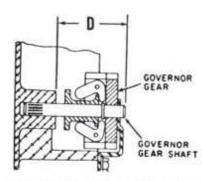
Correct installation of governor shaft and gear and weight assembly on Models HH70, HM70, HM80 and HM100. Dimension (D) is 1-% inches (34.9 mm) on Models HM70, HM80 and HM100 or 1-17,64 inches (32.1 mm) on Models HH70.
